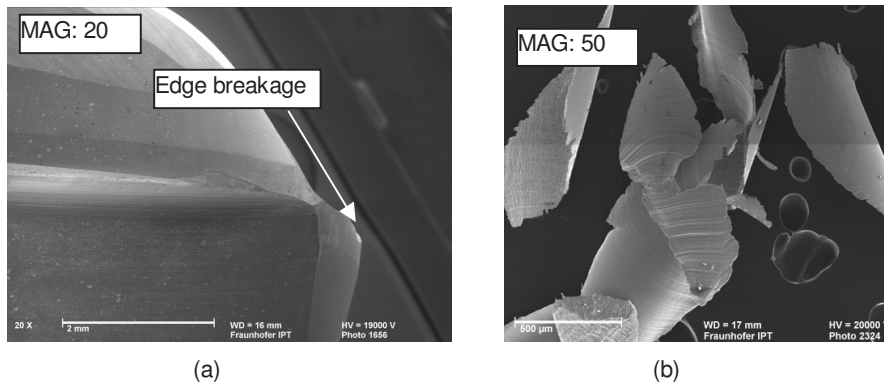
Chip formation and tool wear (cutting speed 204 m/min, feed 0.2mm/tooth, depth of cut 0.2 mm, width of cut 0.2 mm)
